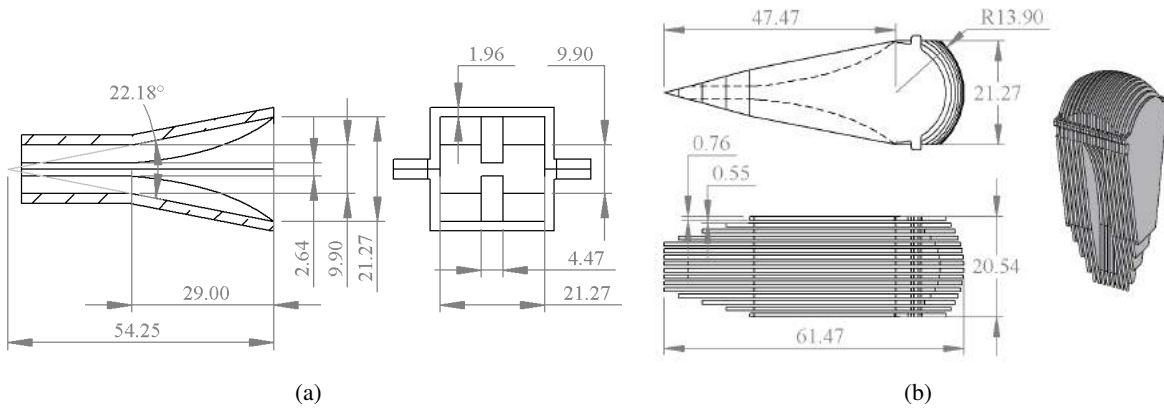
(a) Exponentially-tapered horn dimensions, and (b) lens geometry (dimensions in mm).
